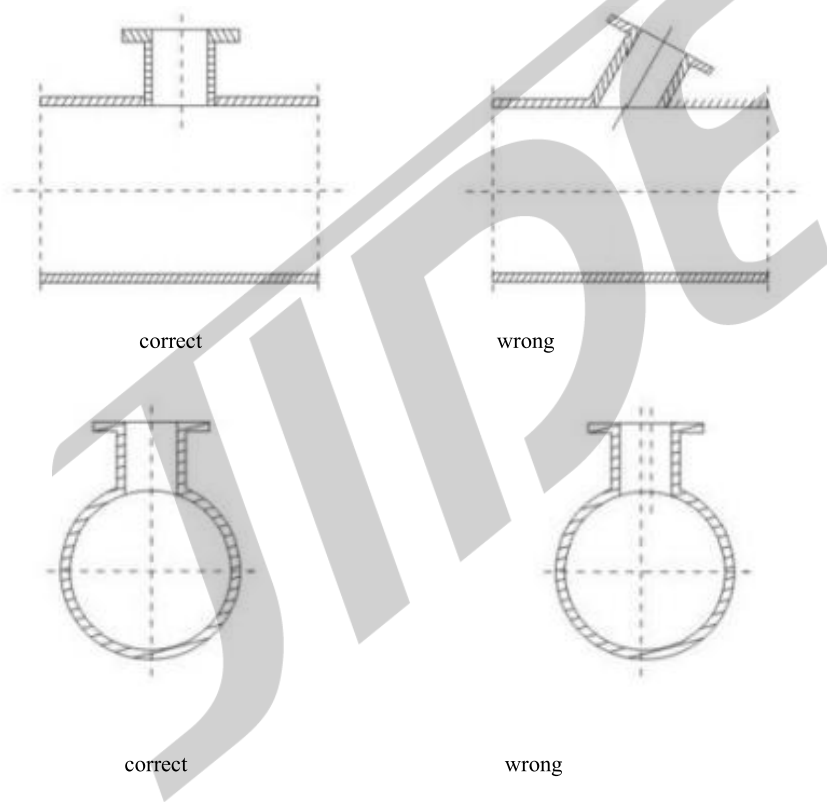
Flange Position of Plug-in Vortex Flowmeter Installed on Pipeline
